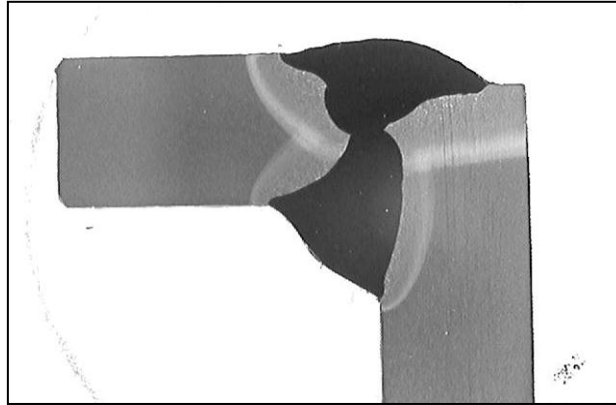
Macro of the weld cross-section produced with parameters detailed in Table 2 – Test 9.
